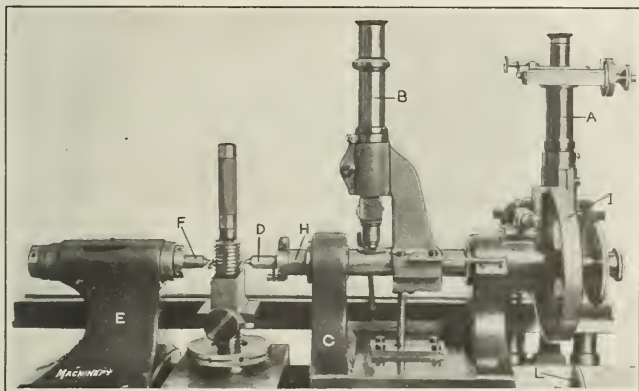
Close View of Machine in Fig. 14 showing Graduated Wheel and Vernier Scale
